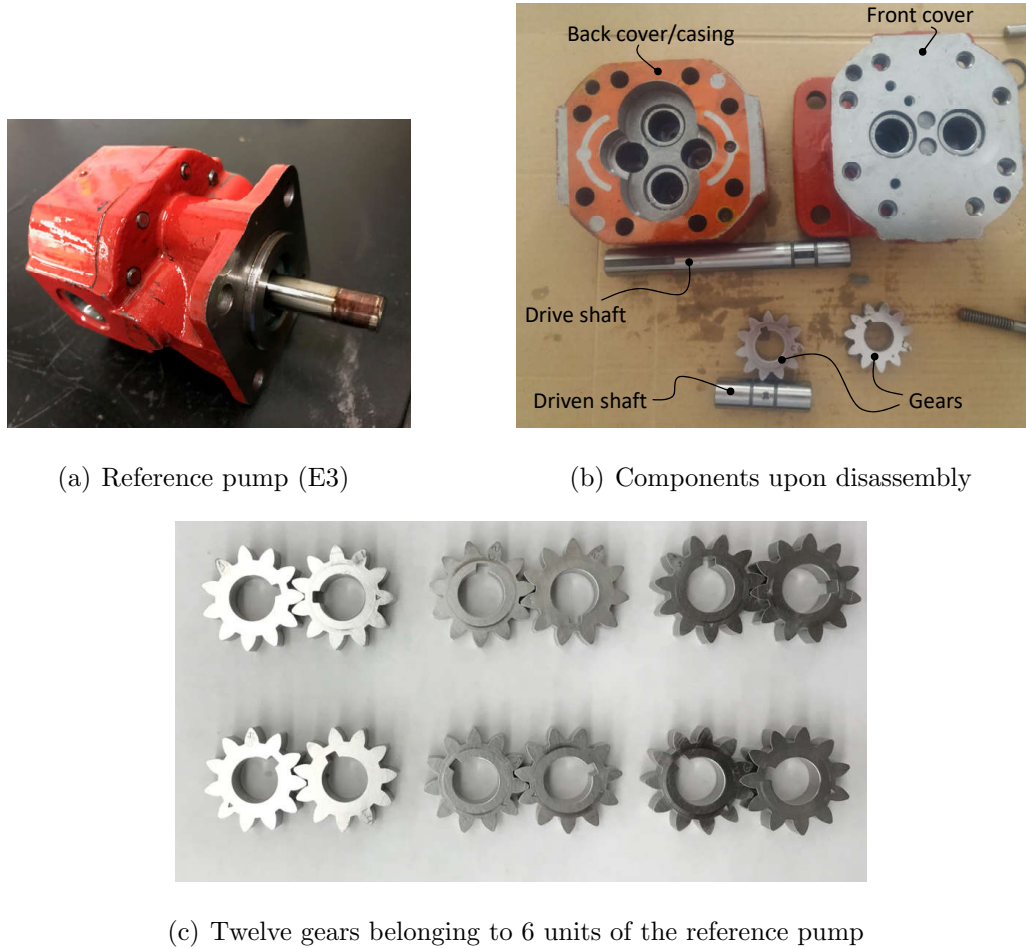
Reference pump disassembled and gears obtained from six such units.
